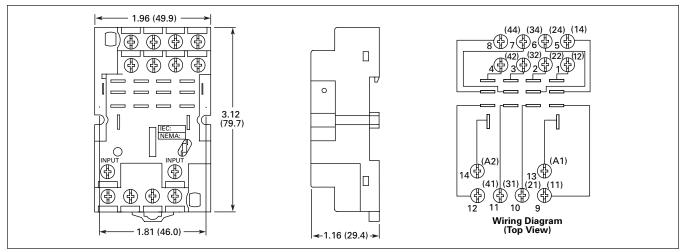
D7PAD — Approximate Dimensions in Inches (mm)
